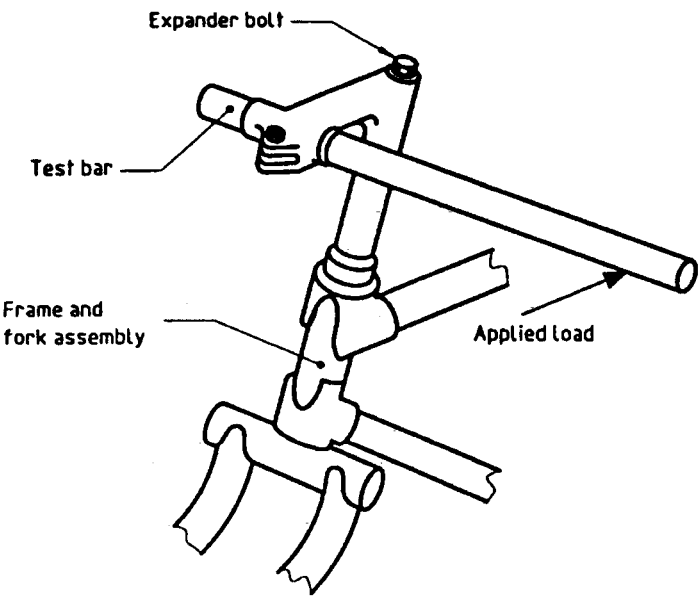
TORQUE TEST ON HANDLE BAR/FORK CLAMPING DEVICE
